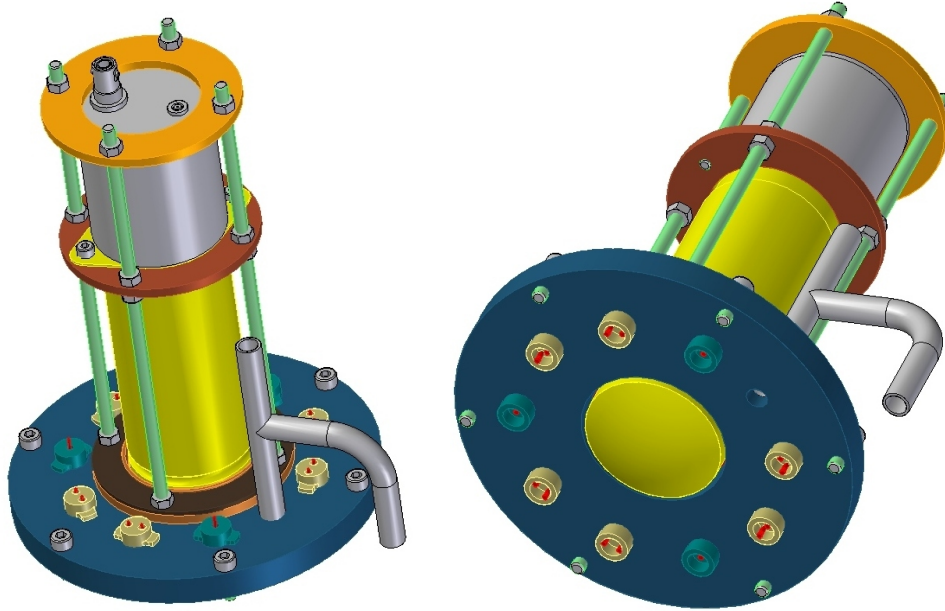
In version 2 of the cable feedthroughs the upper flange (right) contains nine bore holes. In each hole, a PTFE plug (left) is pressed, containing two pins for the CA and NCA readout and one pin for the high voltage supply. The plugs were designed such that an interchange between readout and HV pins was not easily possible. However, the HV pin and the anode readout were very close and a leakage current occurred.
